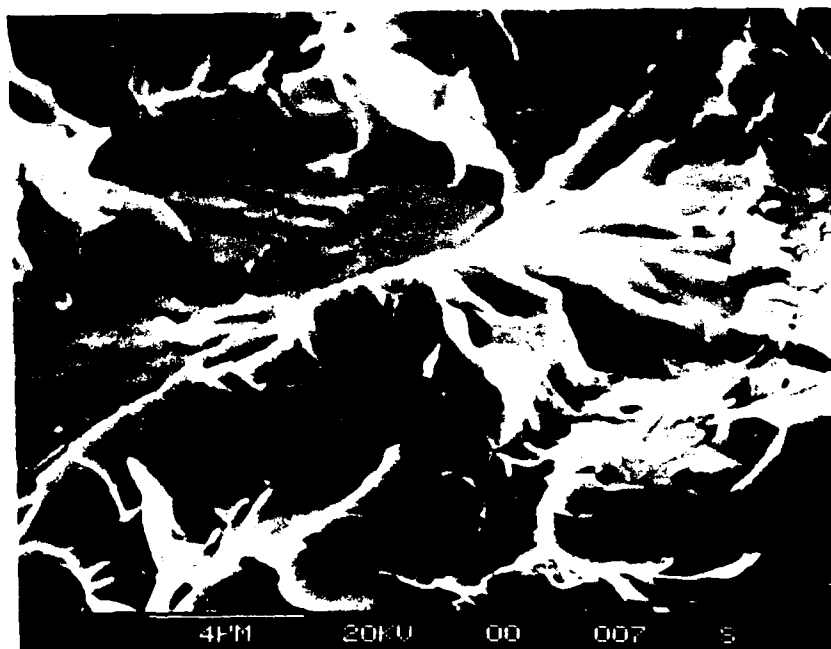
Charpy impact specimen fracture surface showing M-A initiation site.
